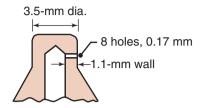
Cross section of a fuel-injection nozzle, showing a small hole made by the electrical-discharge machining process (Section 27.5). The material is heat-treated steel.
